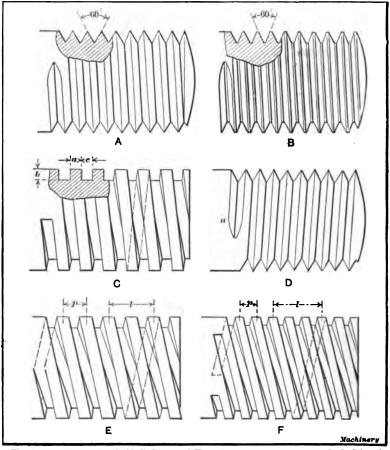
(A) V-thread. (B) U. S. Standard Thread. (C) Square Thread. (D) Left-hand Thread. (E) Double Square Thread. (F) Triple Square Thread
